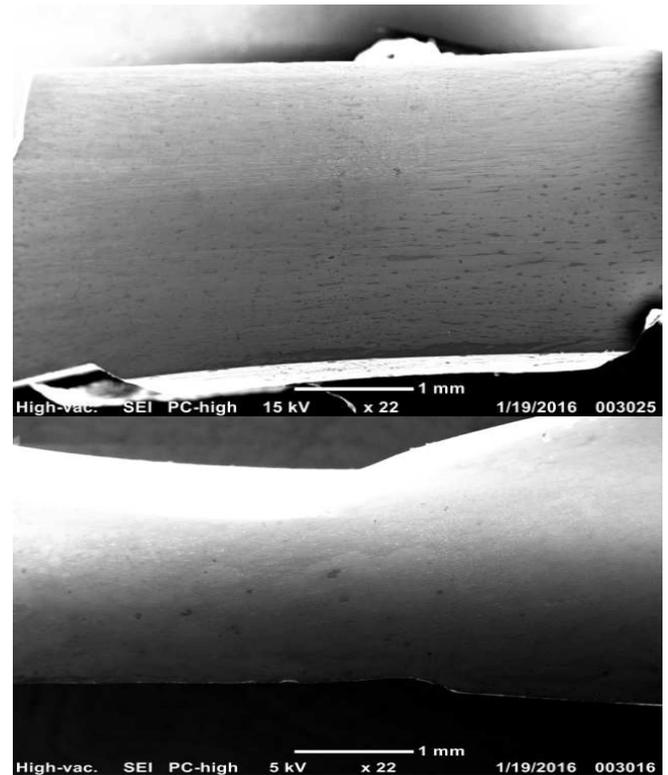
Macrochips of samples made by arc welding with non-consumable tungsten electrode TIG (from below), welded with a consumable electrode with the CMT process (from above)
